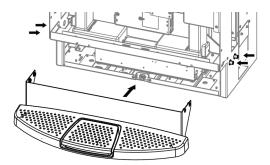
Installing x-ray footswitch assembly (which includes new lower front panel kick plate)
